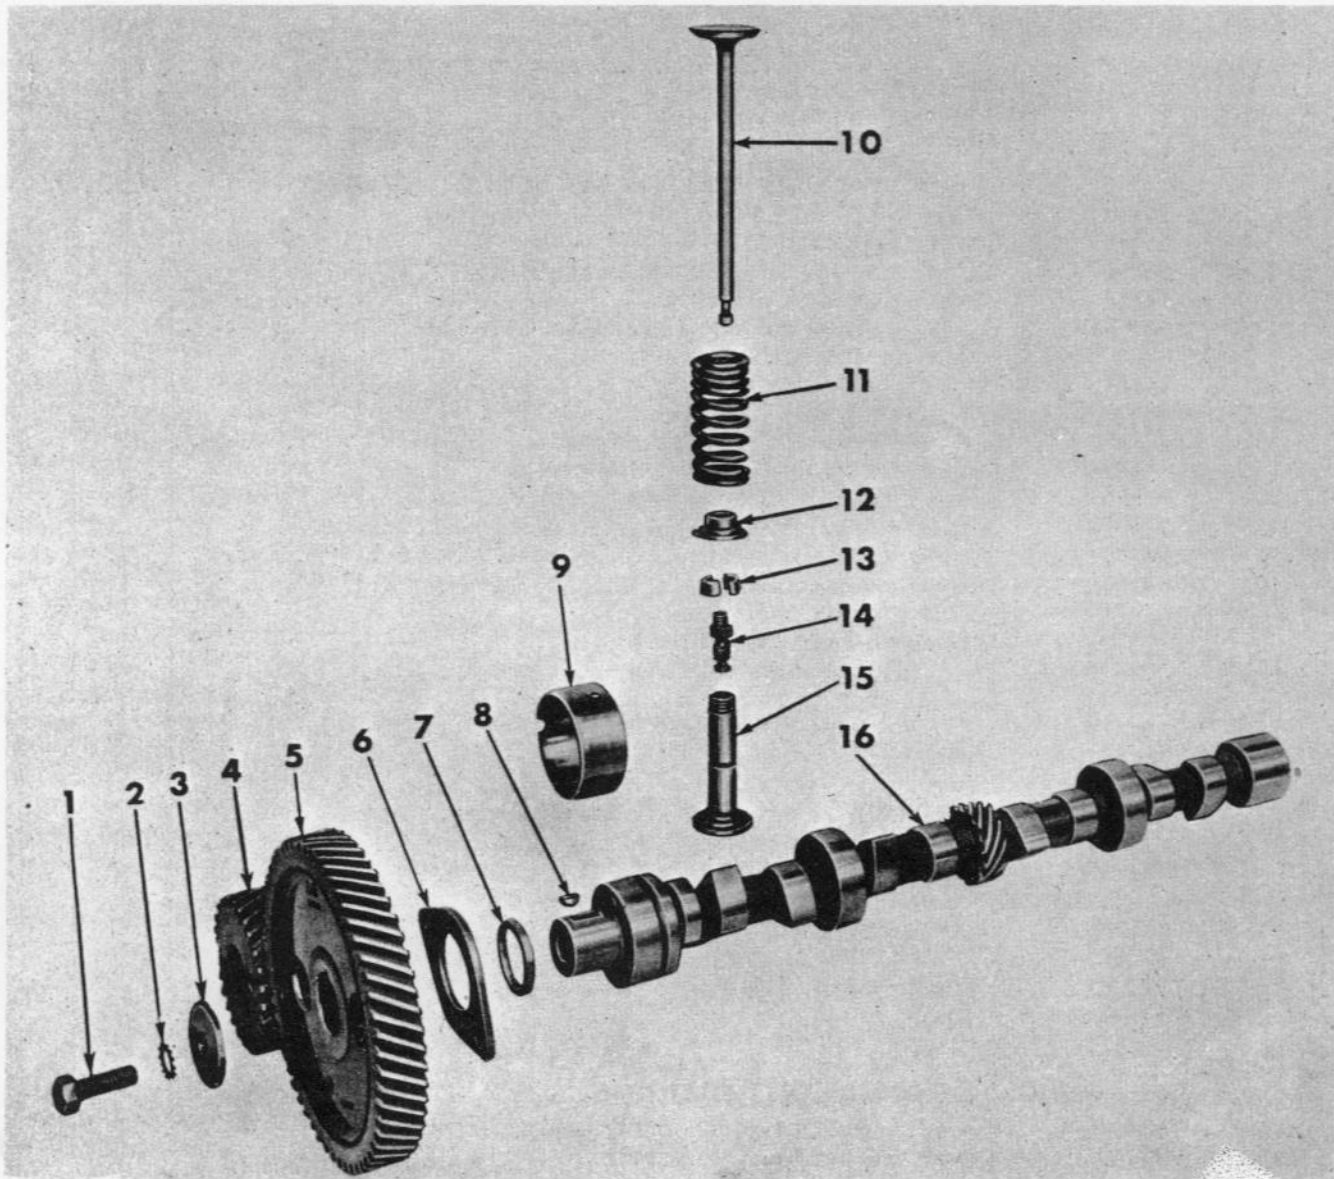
CAMSHAFT TIMING GEARS AND VALVES—4L
